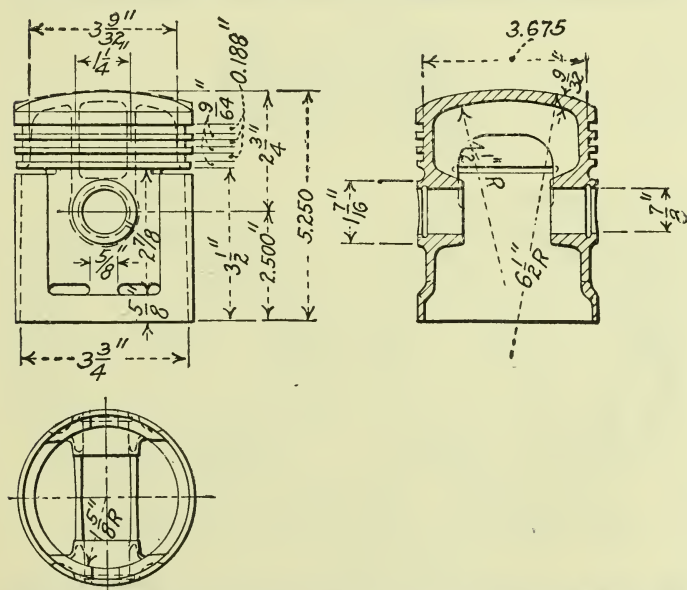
IN THIS PISTON THE MECHANICAL EXPANSION DUE TO THE HEAD IS TAKEN CARE OF BY RELIEVING THE SIDES
